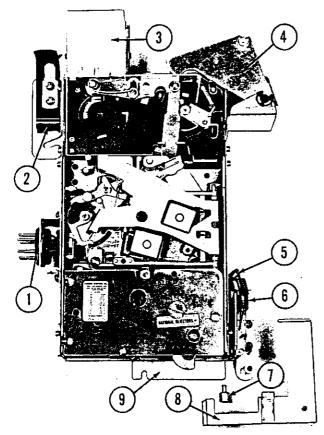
SLUG REJECTOR ASSEMBLY	110982
